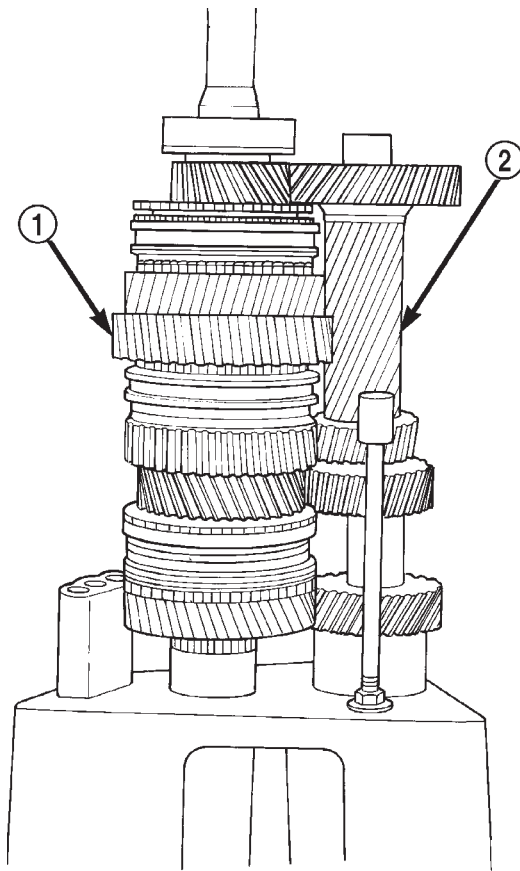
Output Shaft And Geartrain Installed In Input Shaft
